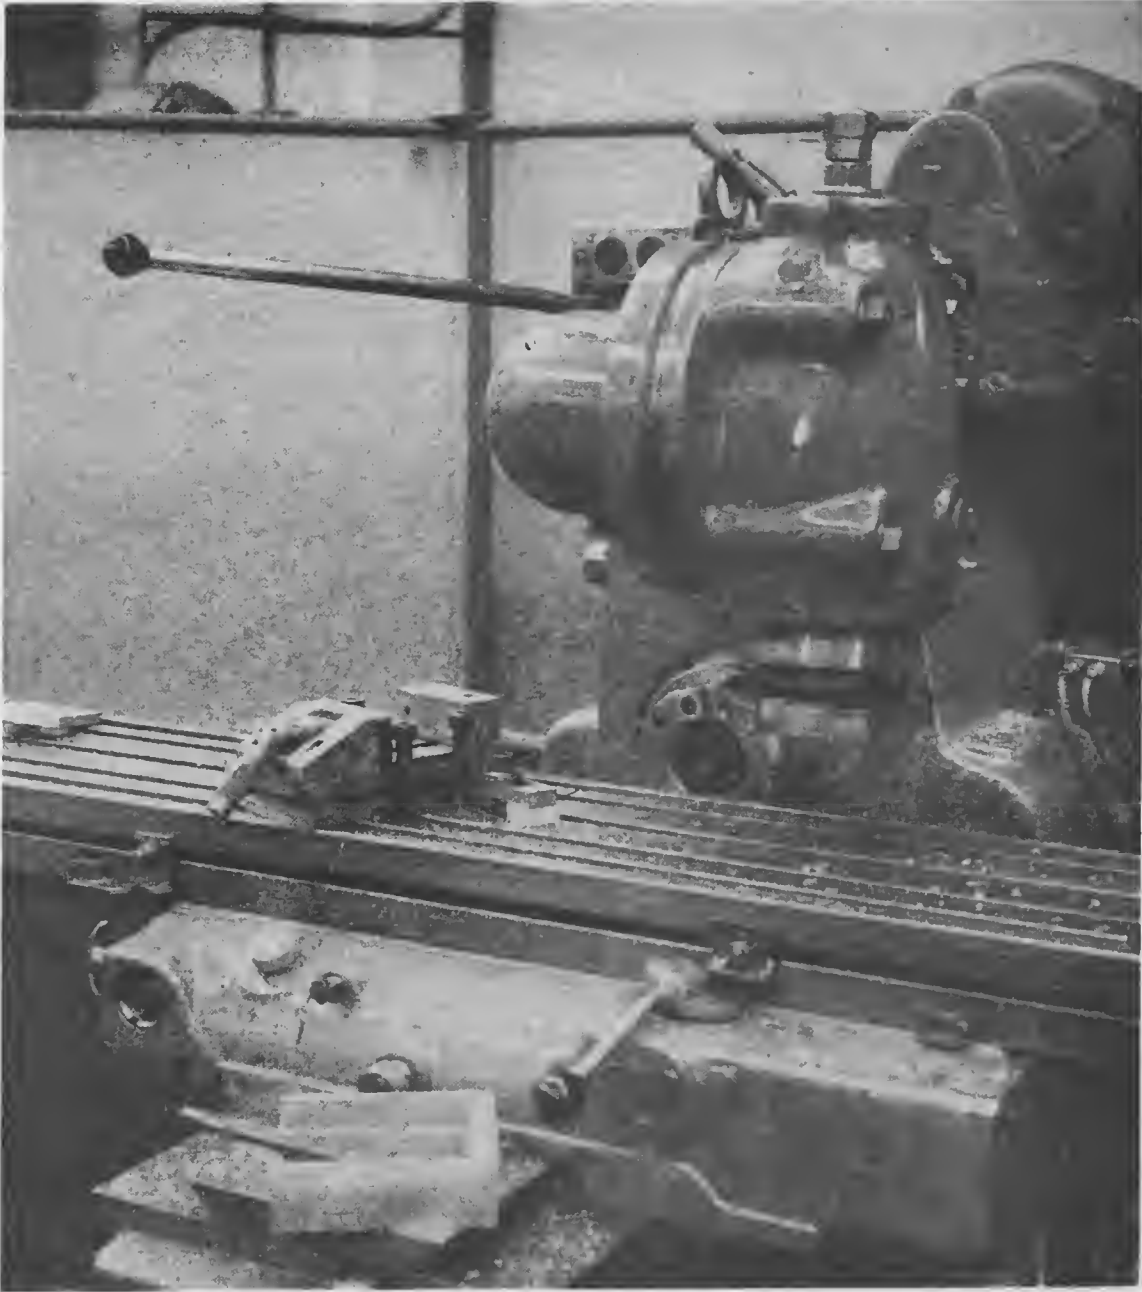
VISE FOR HOLDING CASTING DURING MILLING
